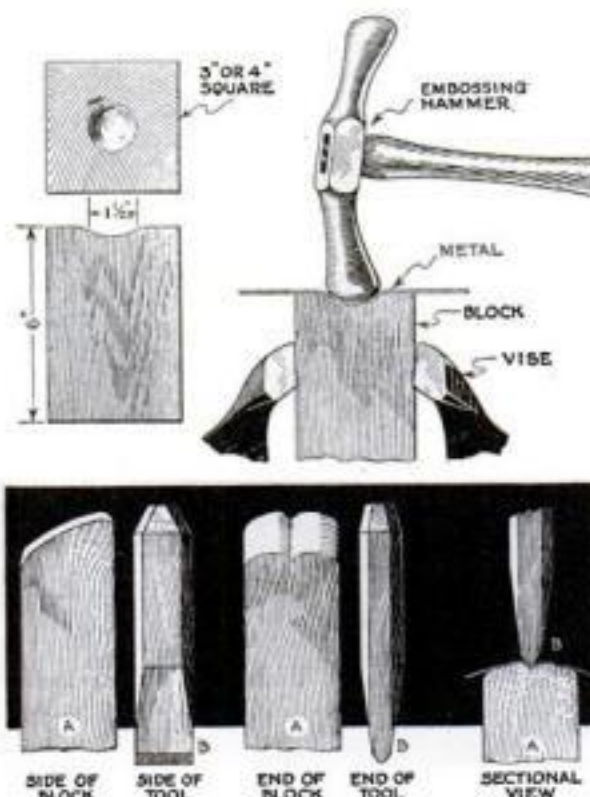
Plain block used for making bowls, and shaped block and tool for decorating them.
